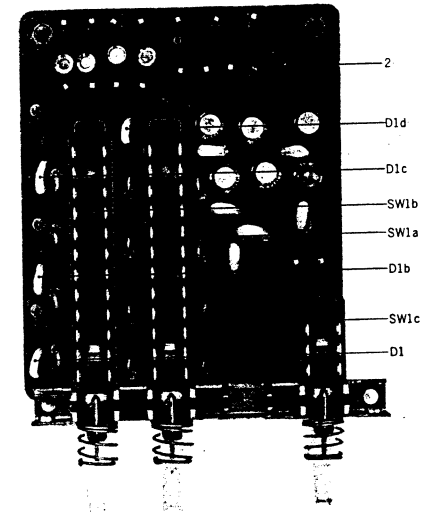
PHOTO OF LOUDNESS P.C. BOARD (98-5016)
